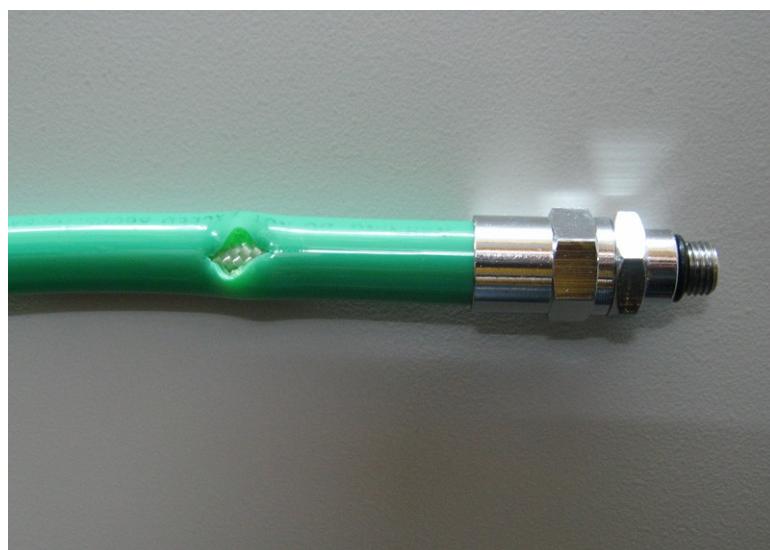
Hose with fitting, where fitting is sharp and has cut the inner hose, showing failure, with burst pressure of 90 bar
